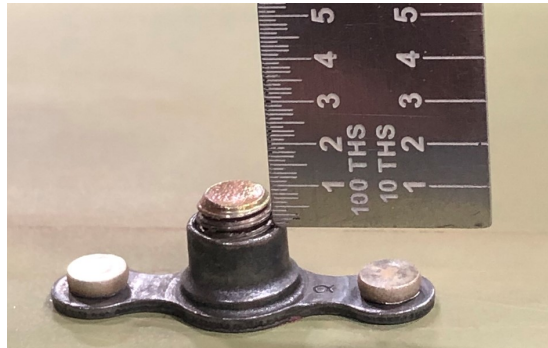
Proper thread protrusion of .05"-.10" beyond nut plate
